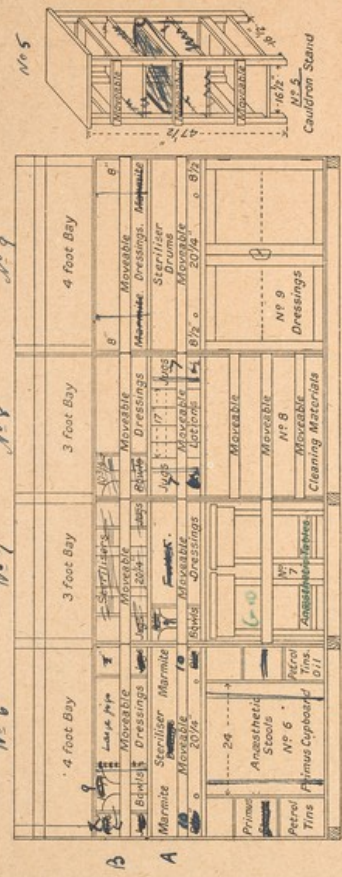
Longitudinal Section, right-hand side. (Compare with photograph, fig. 4.) Scale 3/4 inch to the foot.
